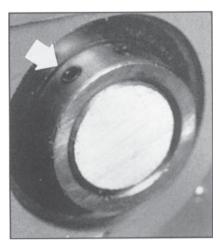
The bearing set screws, one on each side of the rotor, should be checked for tightness every six months.
